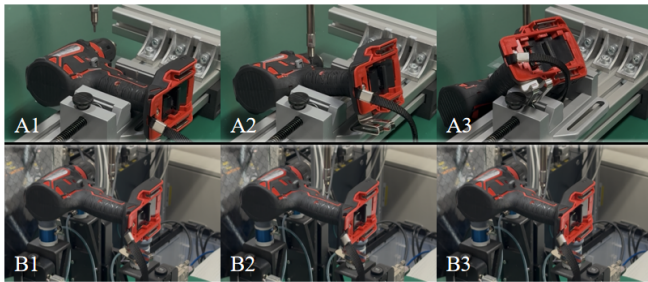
(A1–A3) Disassembly using a traditional rigid gripper. (B1–B3) Disassembly cycle using our proposed system. The screwdriver loosens the screw from B1 to B2 and retightens it from B2 to B3 without re-alignment.
